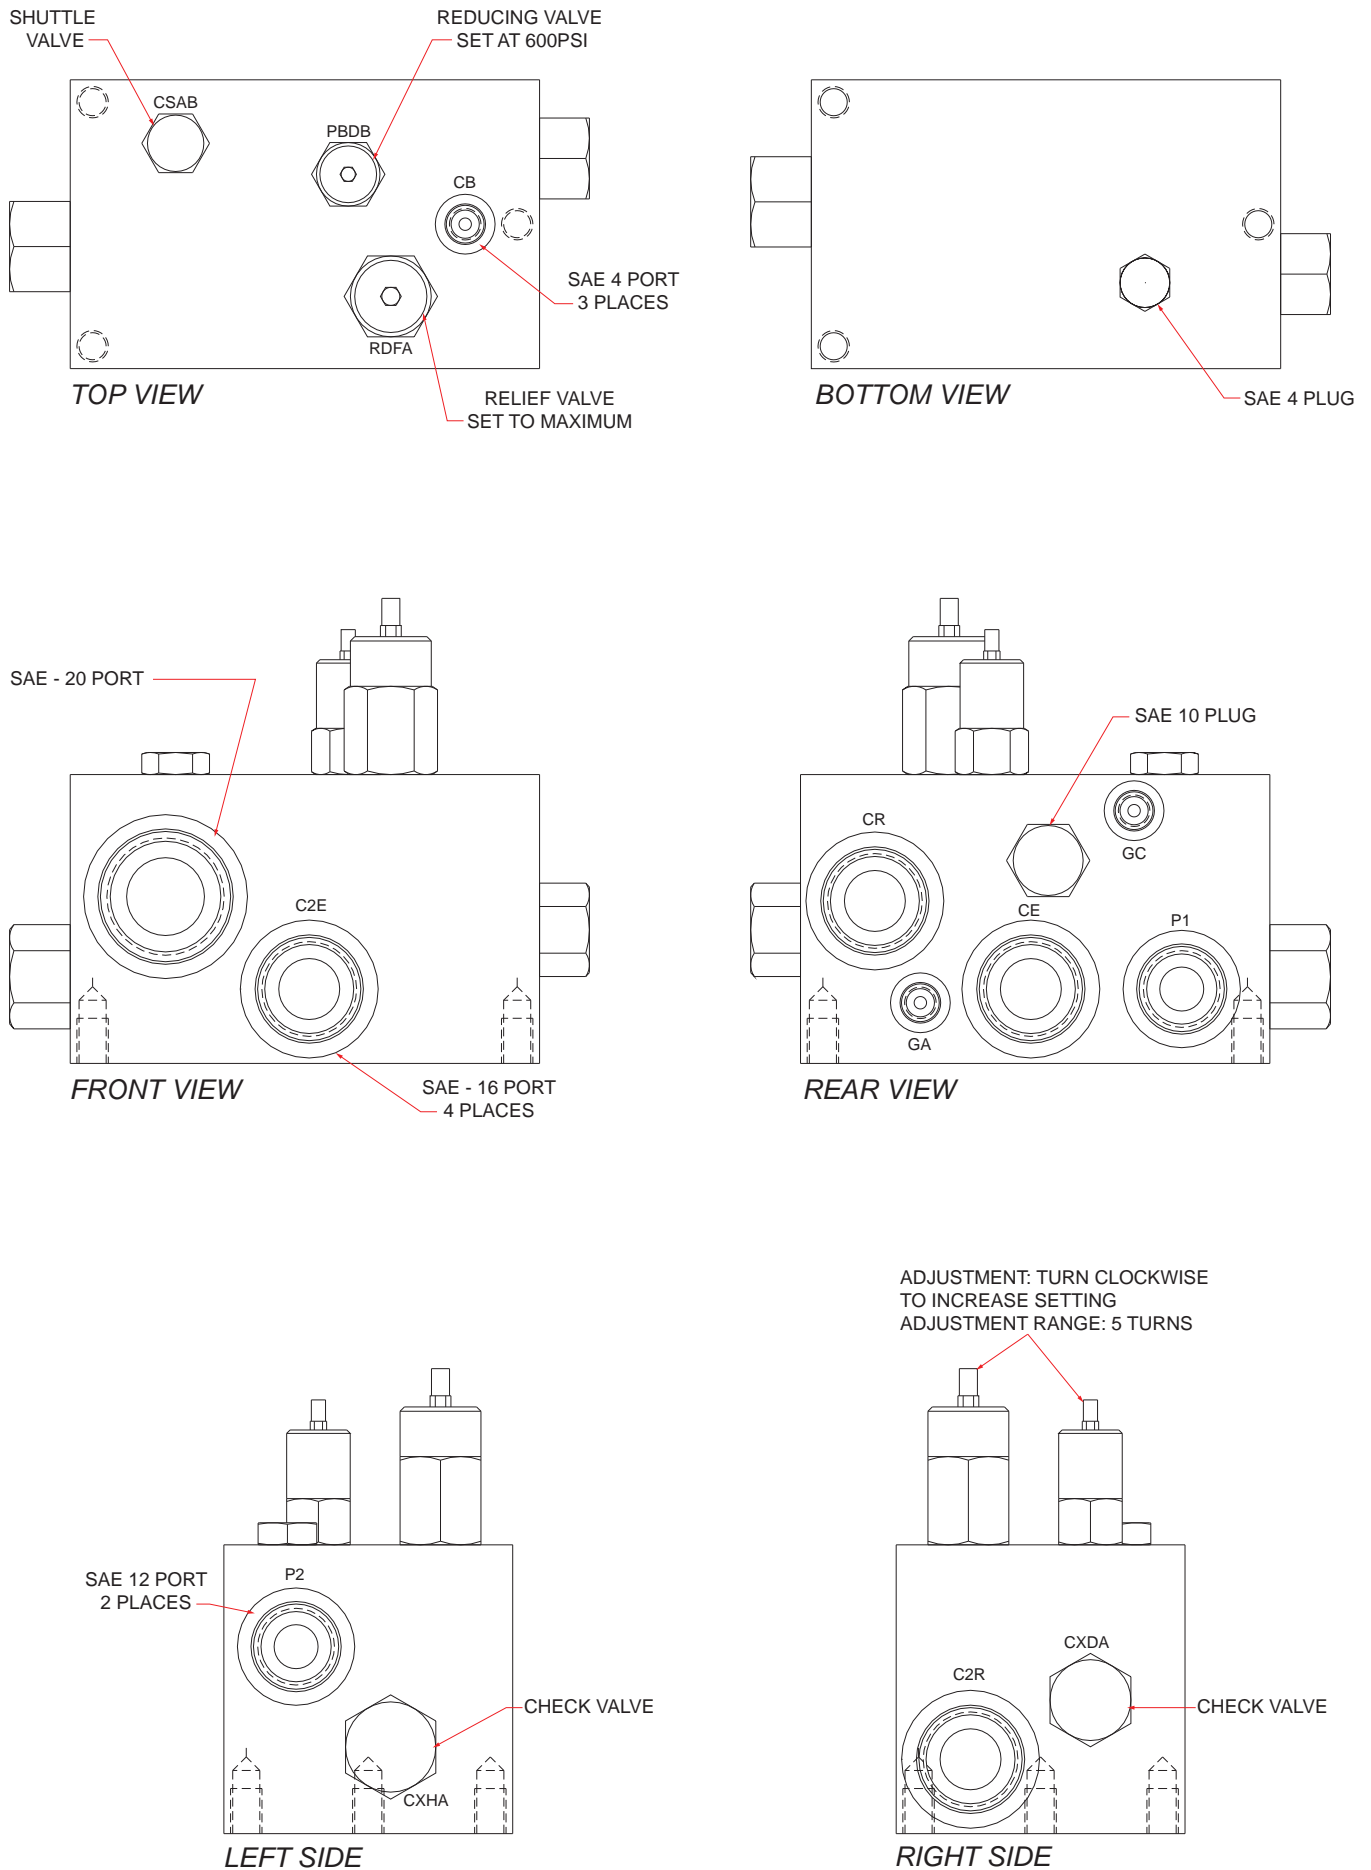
Tensioner Manifold Port Identification (ref. 416113)
